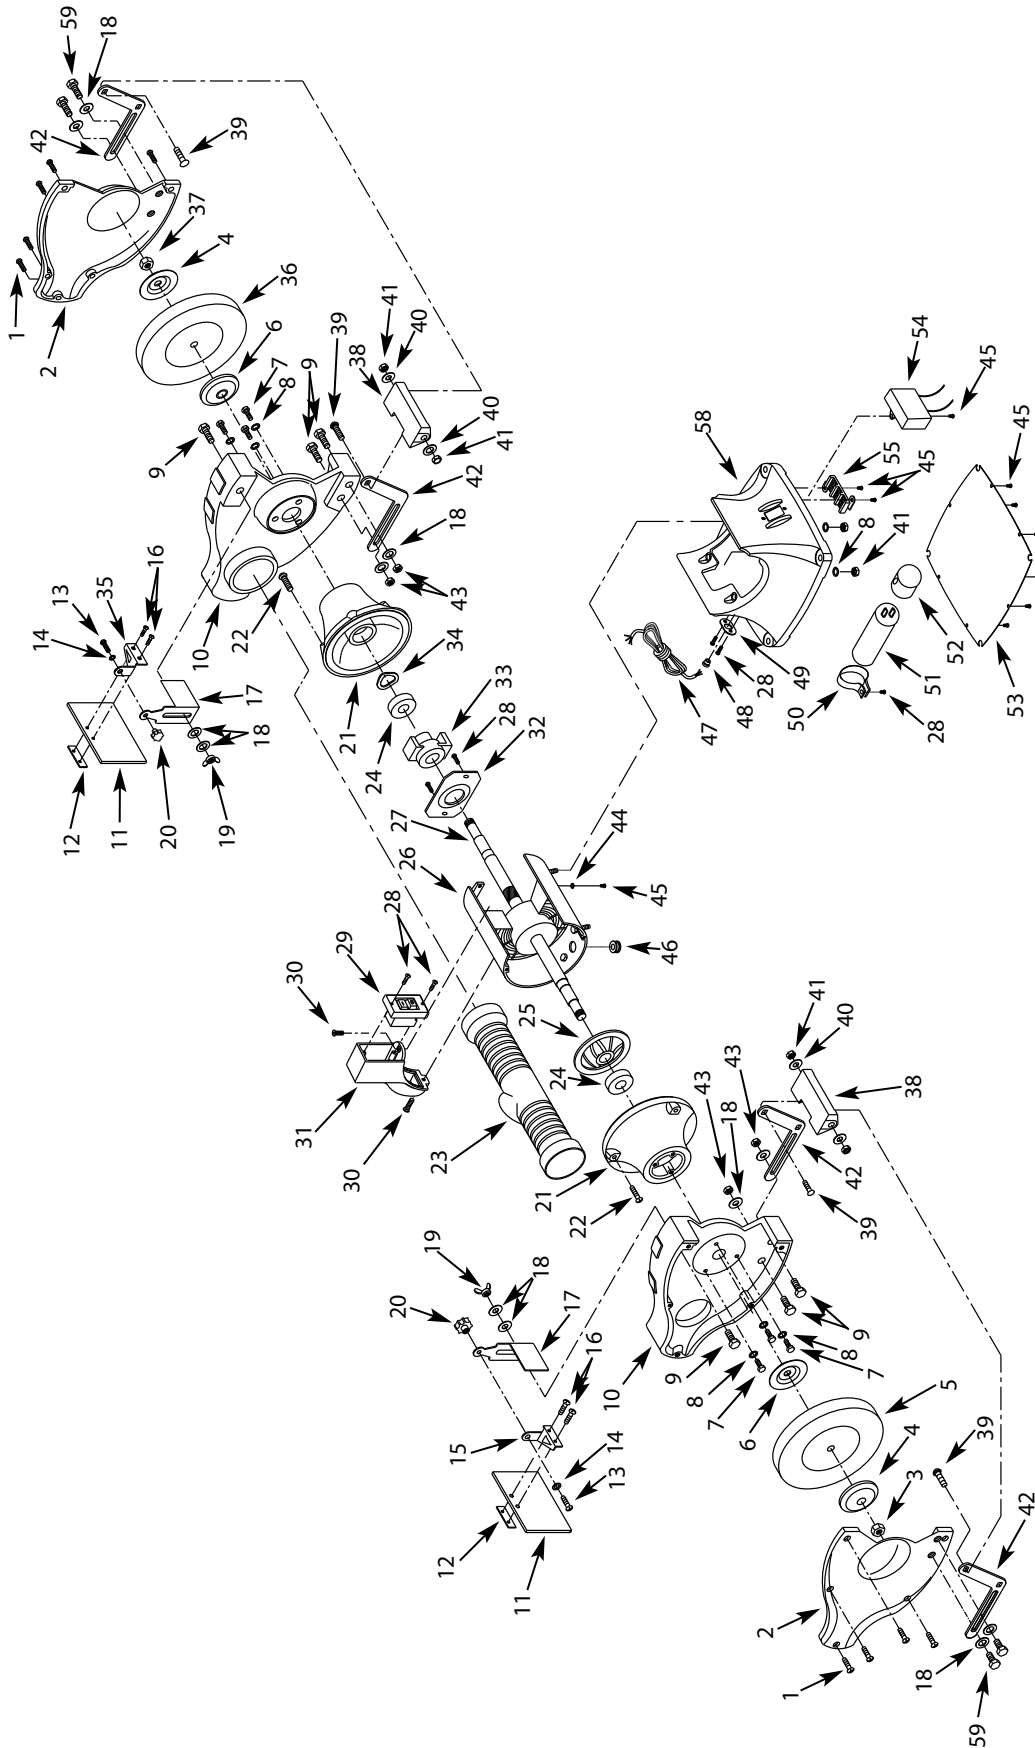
Repair parts illustration for 12" Bench Grinder.
